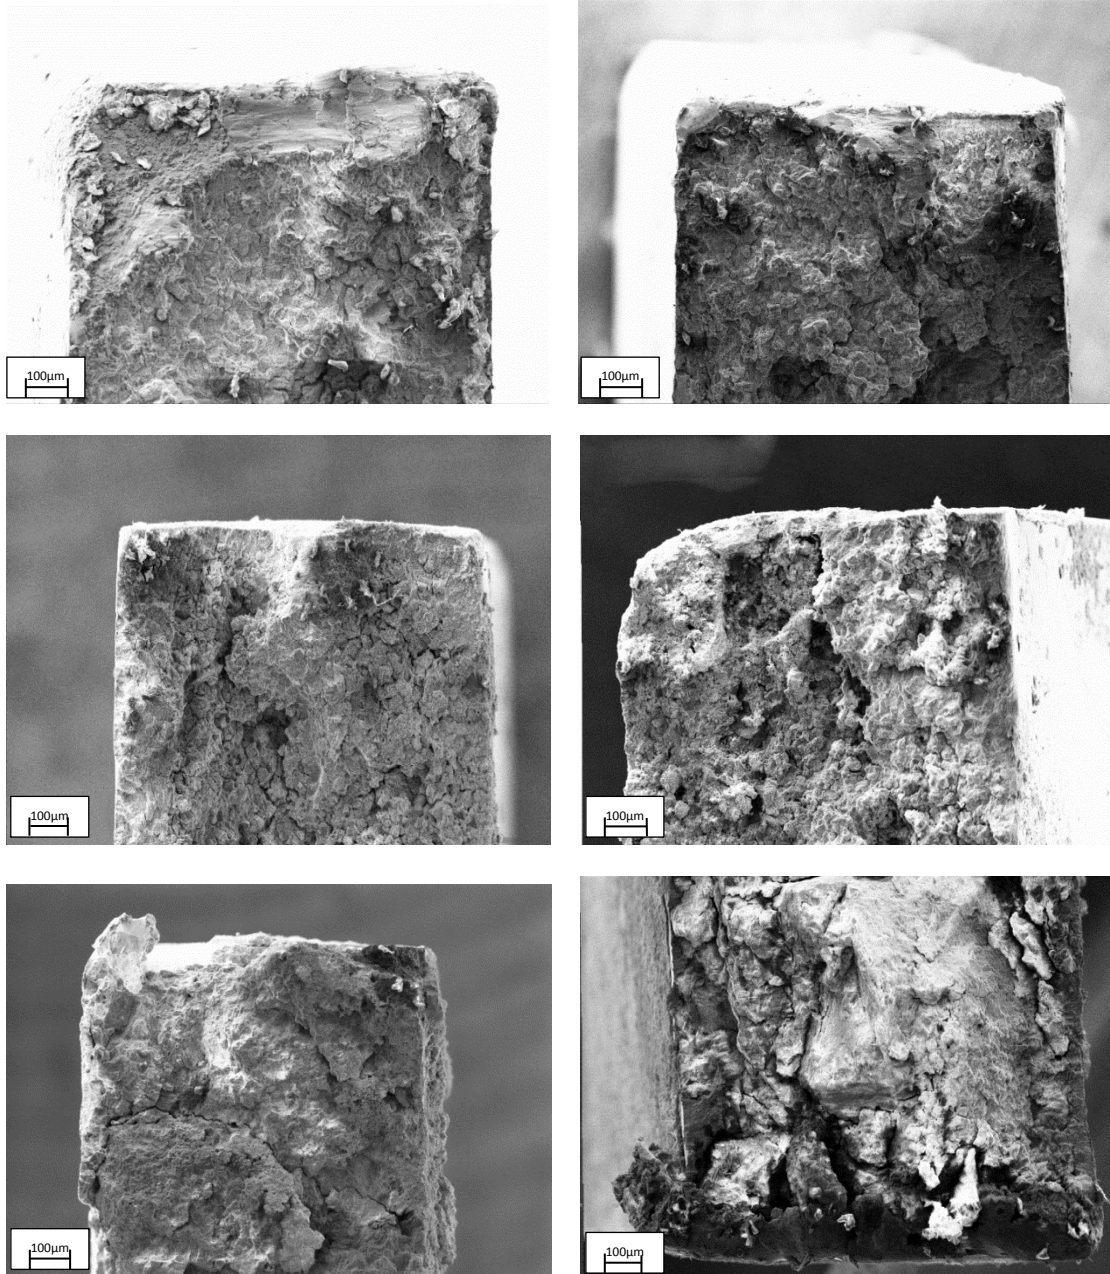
Comparison of fracture surfaces of U-bend specimens.
